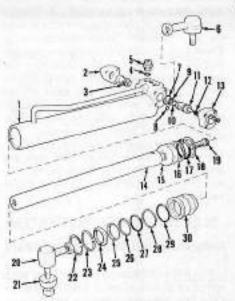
Exploded view of typical side mounted steering cylinder.
